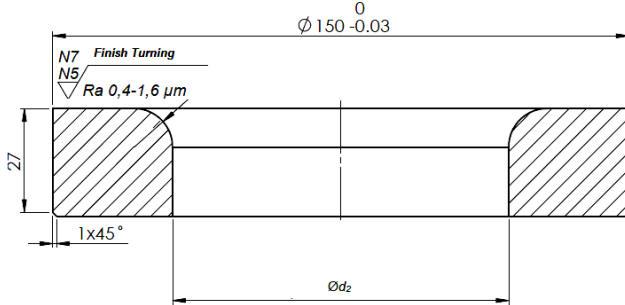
Technical drawing of die with standard dimensions for each drawing ratios
